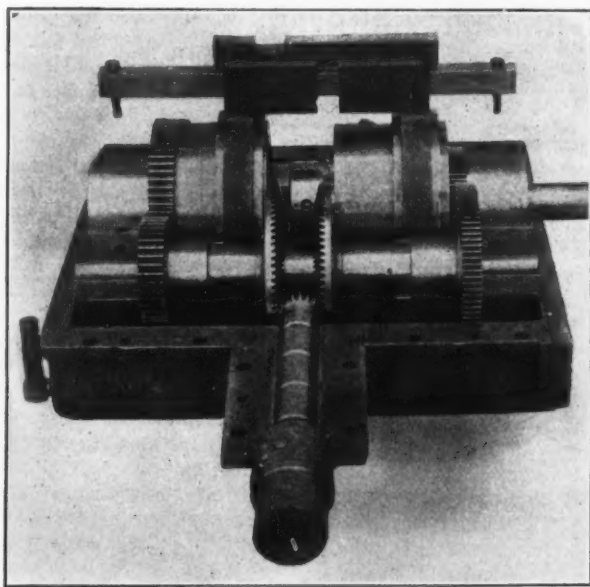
Detail of the Reversing Drive with Cover Removed to Show the Interior.
